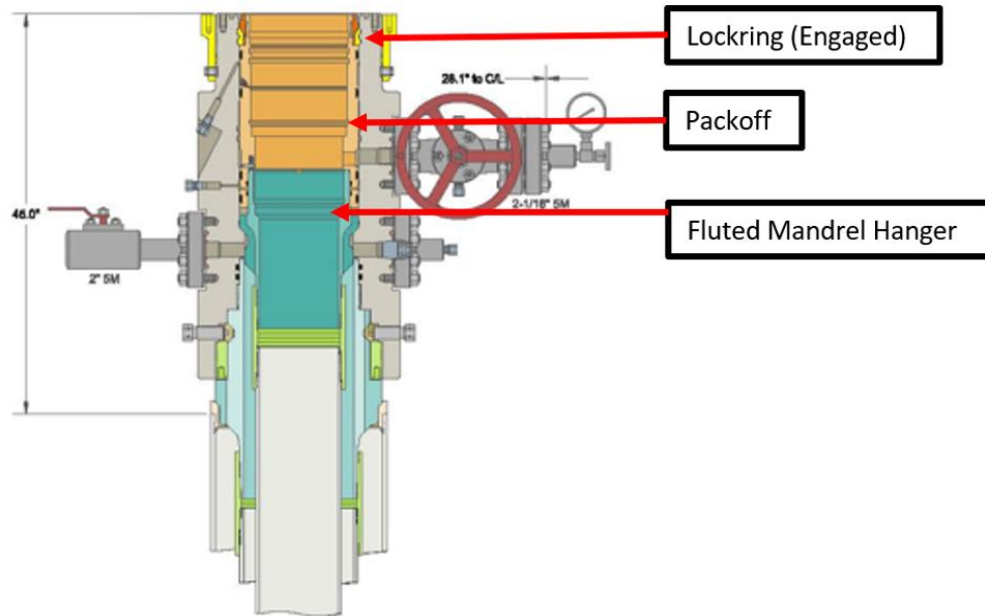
Cactus Offline Cementing Tool Schematic (5M tool)
